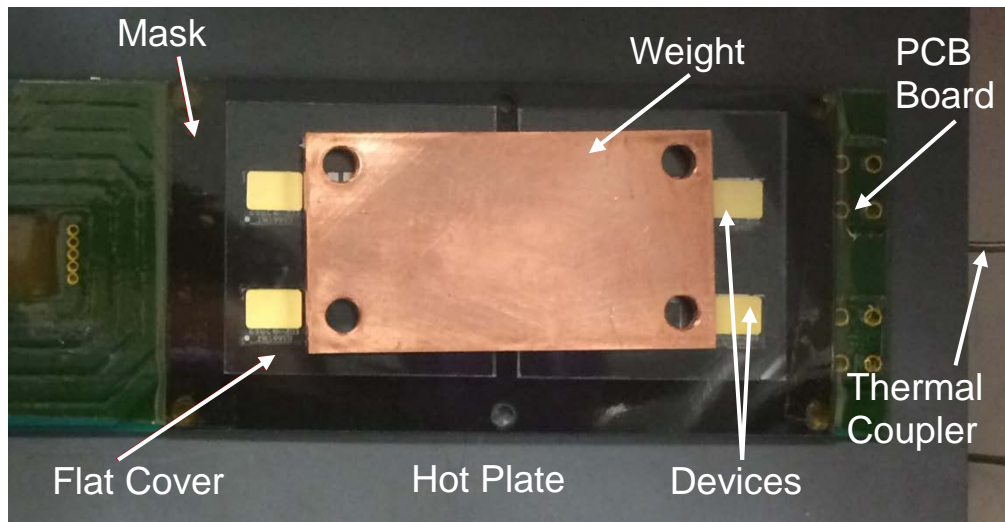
Photo of the final assembly of all parts for soldering multiple GaN MOSFETS (devices) on a PCB board on a hot plate in a solder reflow oven to form a power module.
